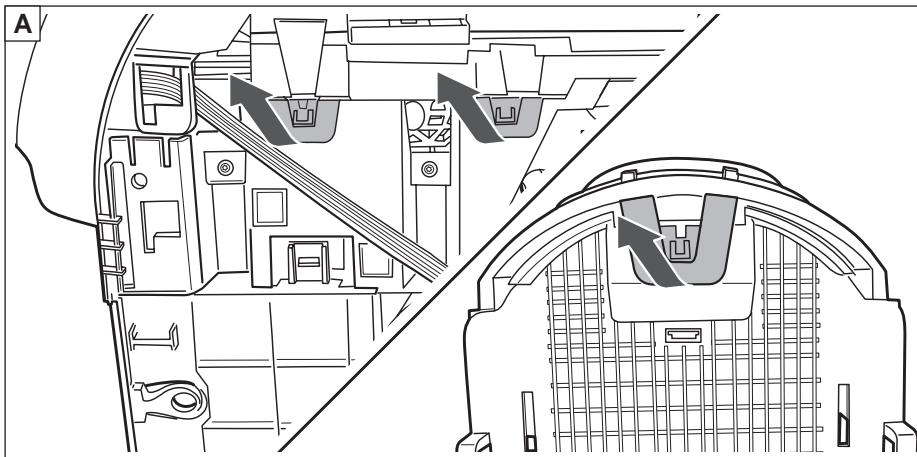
Figure A: use a flathead screwdriver to lift and release the clips on the top cover (two per side and one rear).
